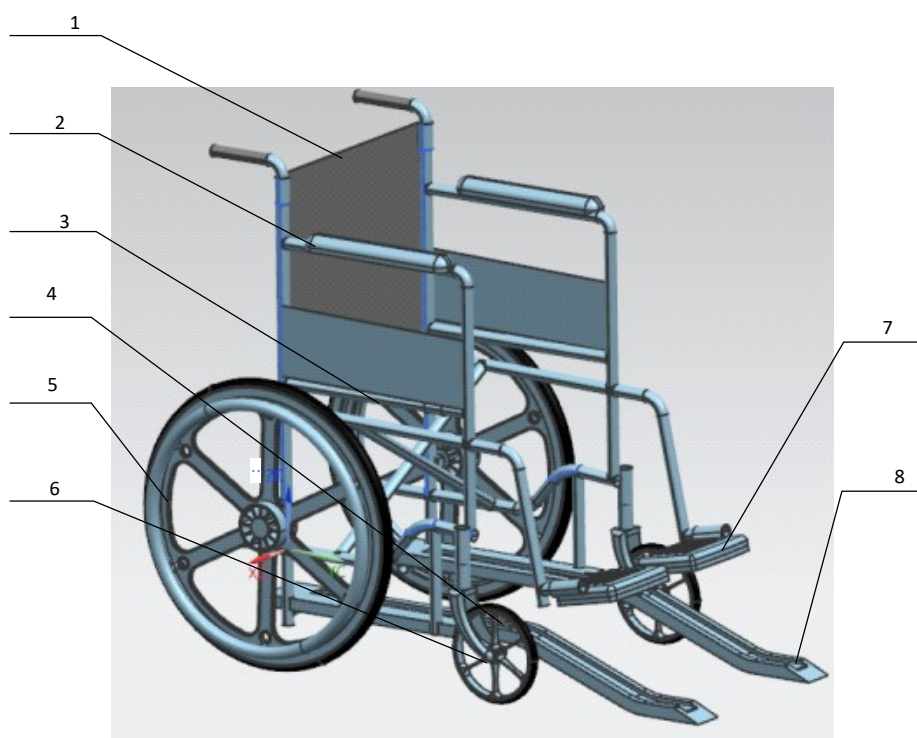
(1, Backrest; 2, main chair frame unit; 3, chair frame slot mechanism; 4, removable guide rail connection key; 5, chair frame rear wheel; 6, chair frame action wheel; 7, pedal; 8. removable guides.)
